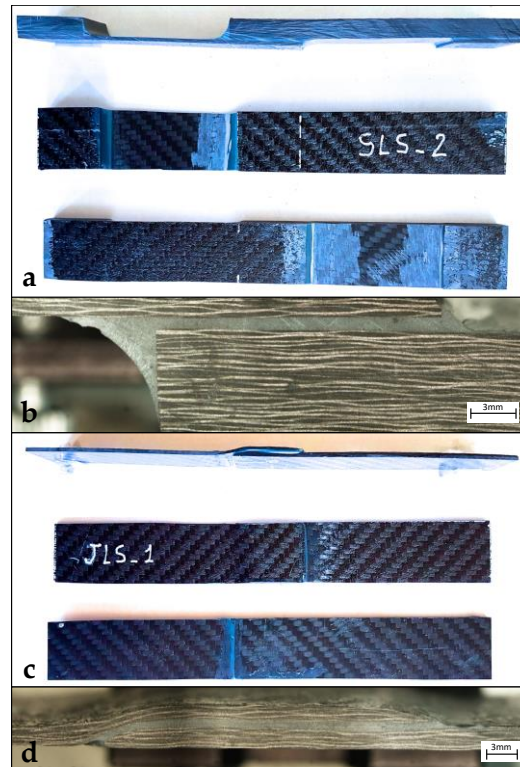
(a) SLS specimen, (b) joint overlap of SLS specimen, (c) JLS specimen, (d) joint overlap of JLS specimen.
